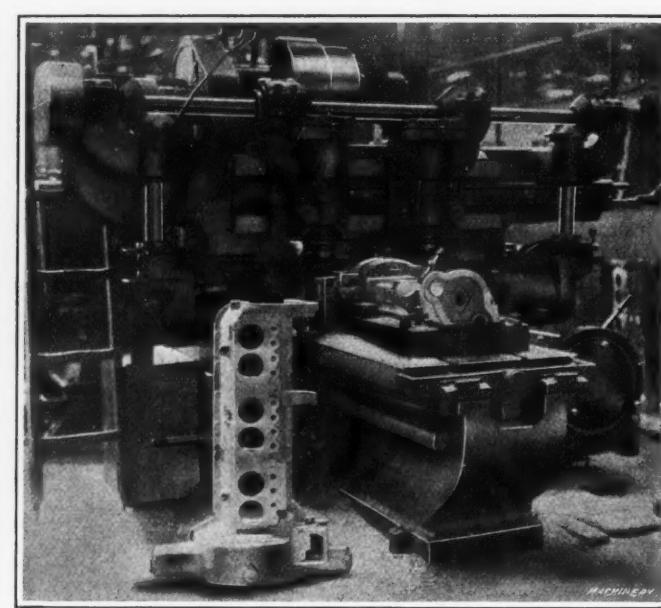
Small Ingersoll Milling Machine used for facing Suspension Arms, Starter Box Seat and Accelerator Pad
